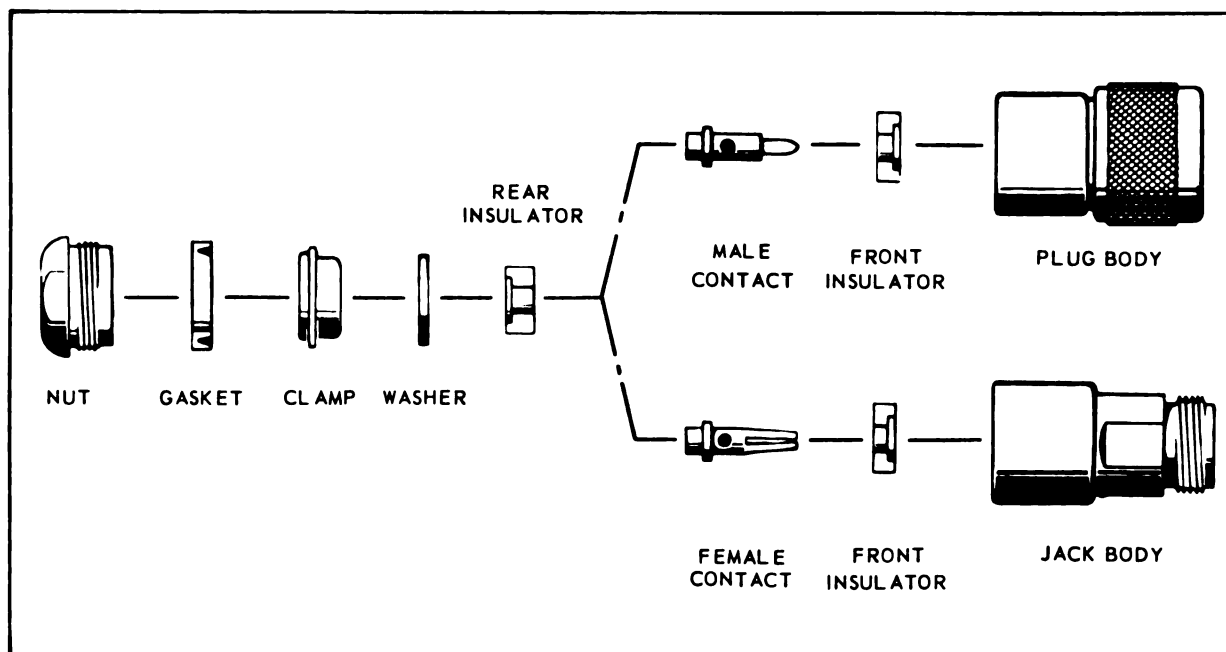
N Connectors with Captivated Contacts - Exploded View
